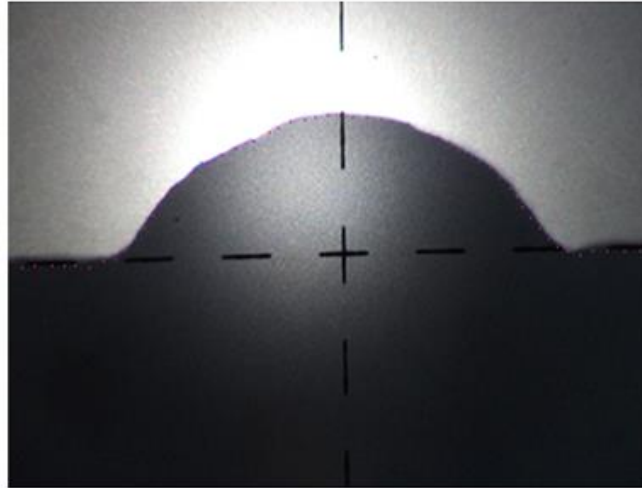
Cross section of a weld-bead used to measuring the profile.
